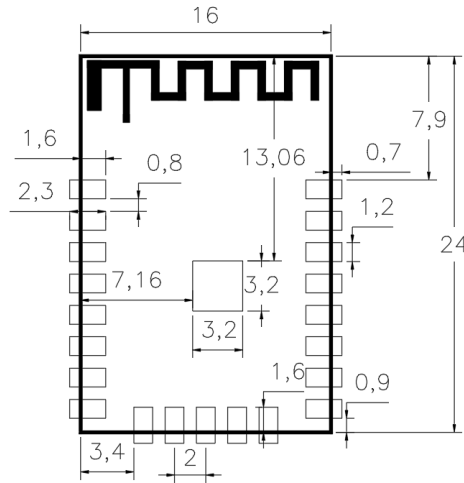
Stamp hole packaging dimension diagram (unit: mm, tolerance: ±0.1, outside: +0.2)
